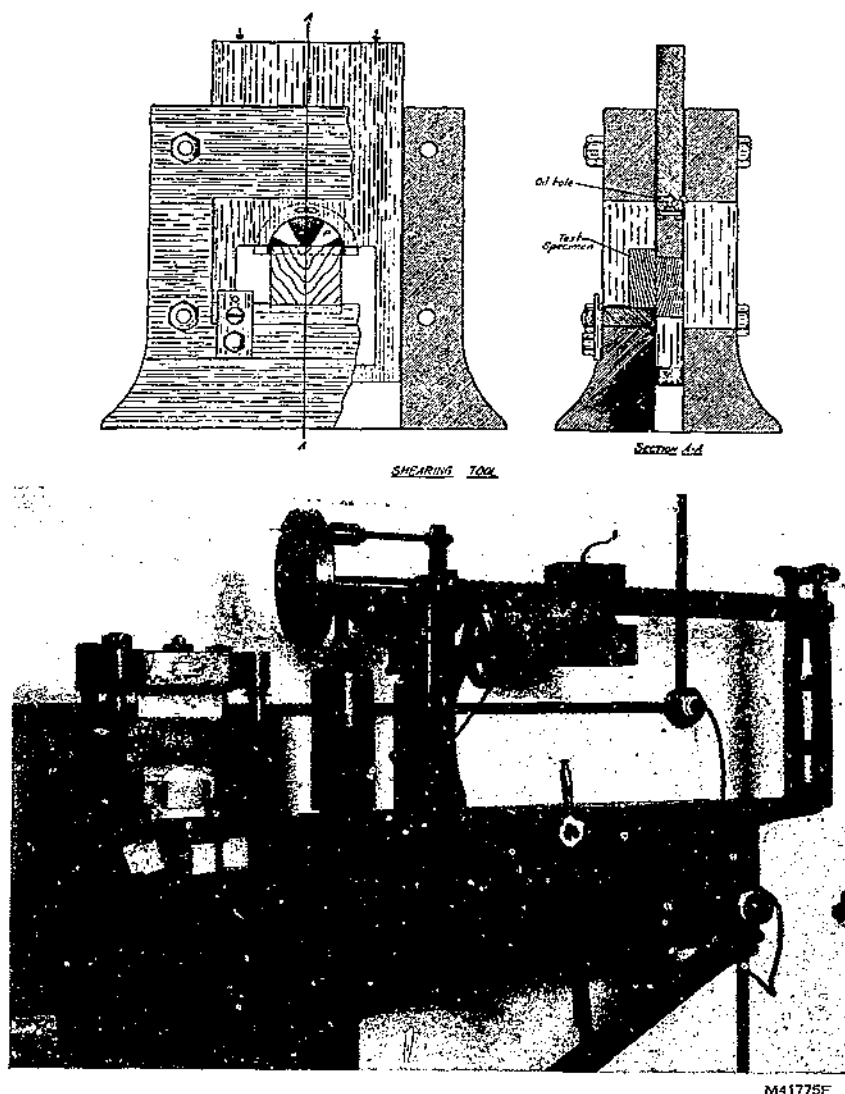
Shearing tool and testing machine used in glue-joint testing.
